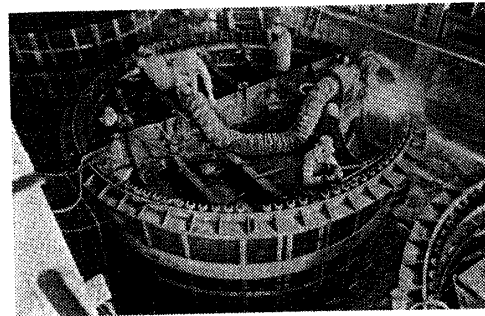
(c) Ring girder for preventing distortion of curtain plate of inner hull plate (The photo. shows welding of plates).
